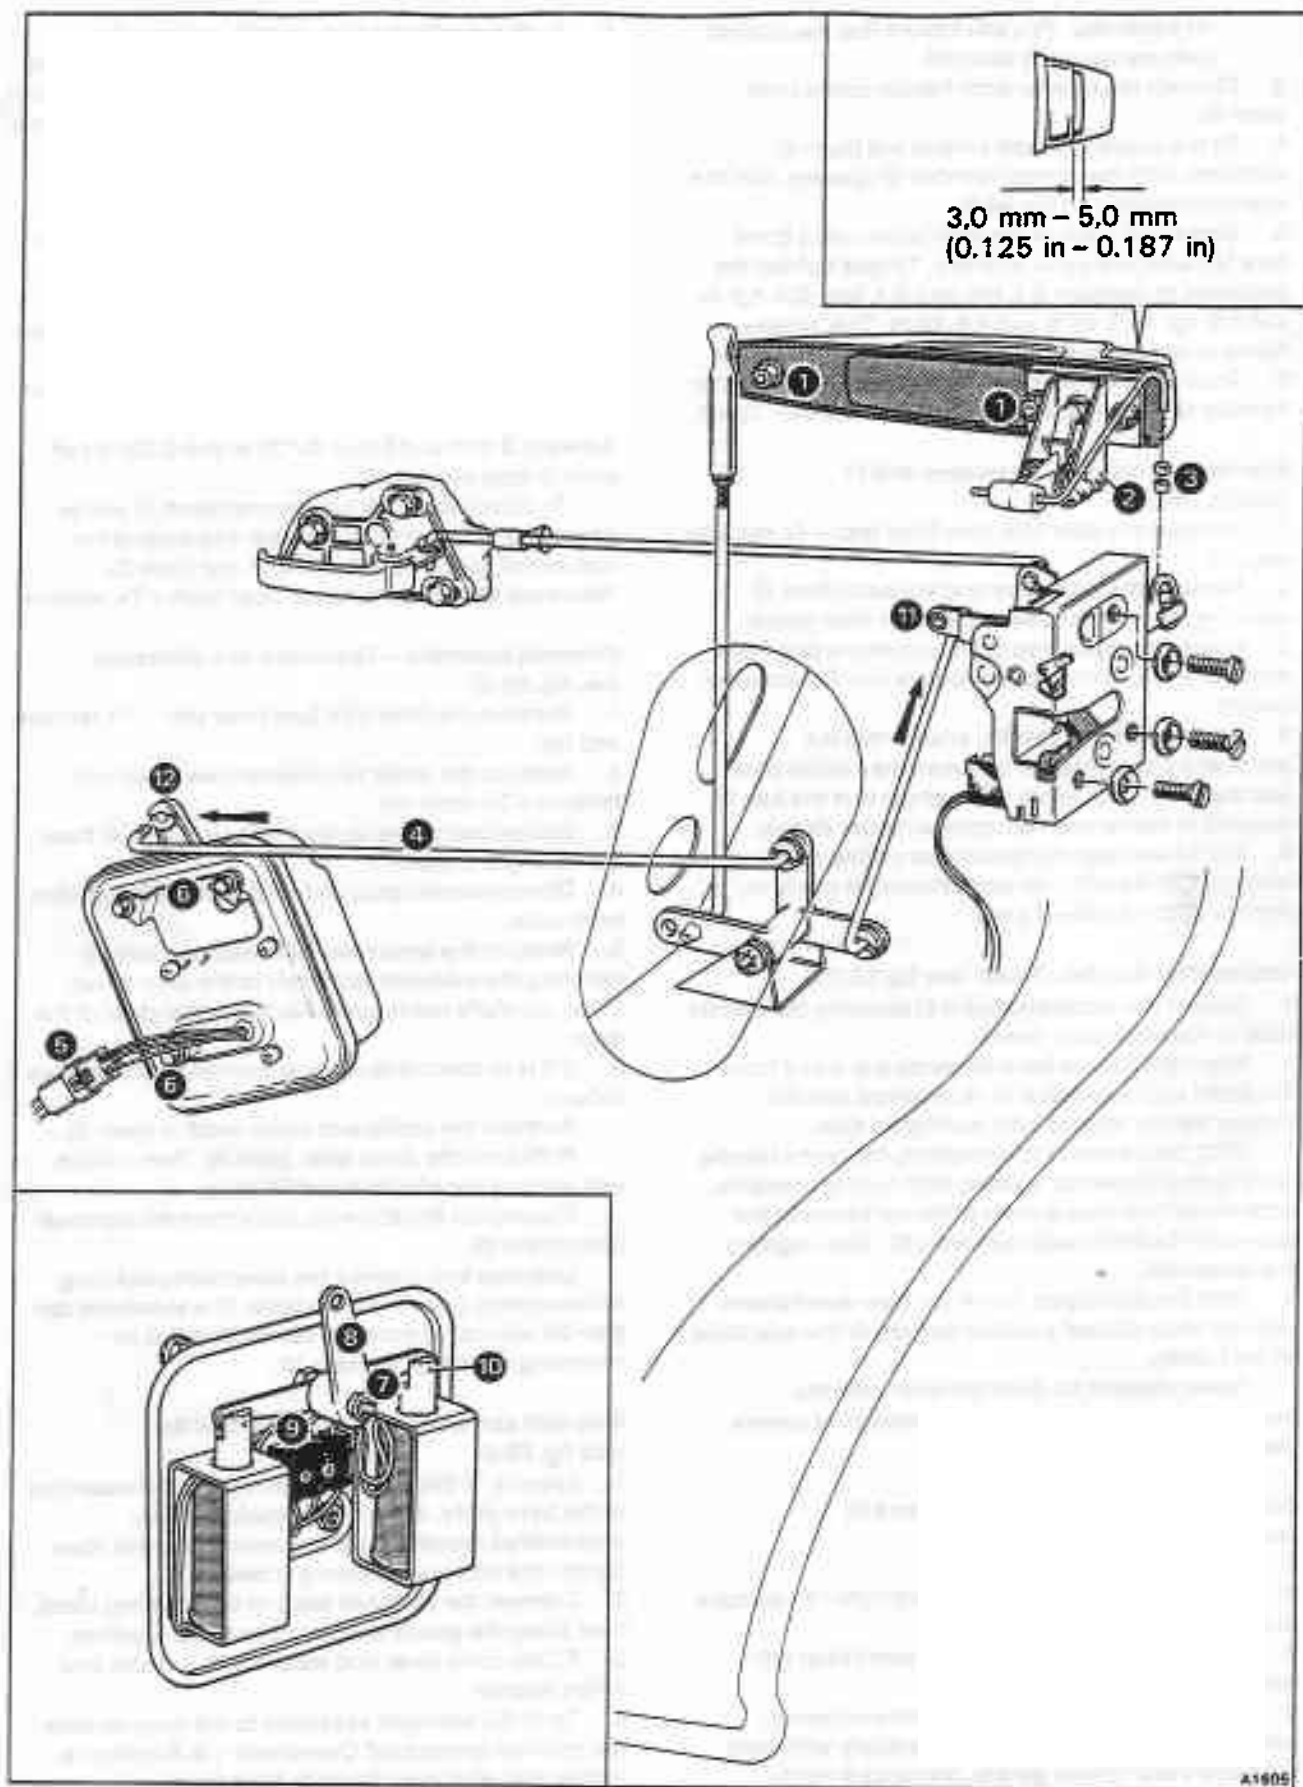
Exterior door handle, solenoid assembly, and fittings
